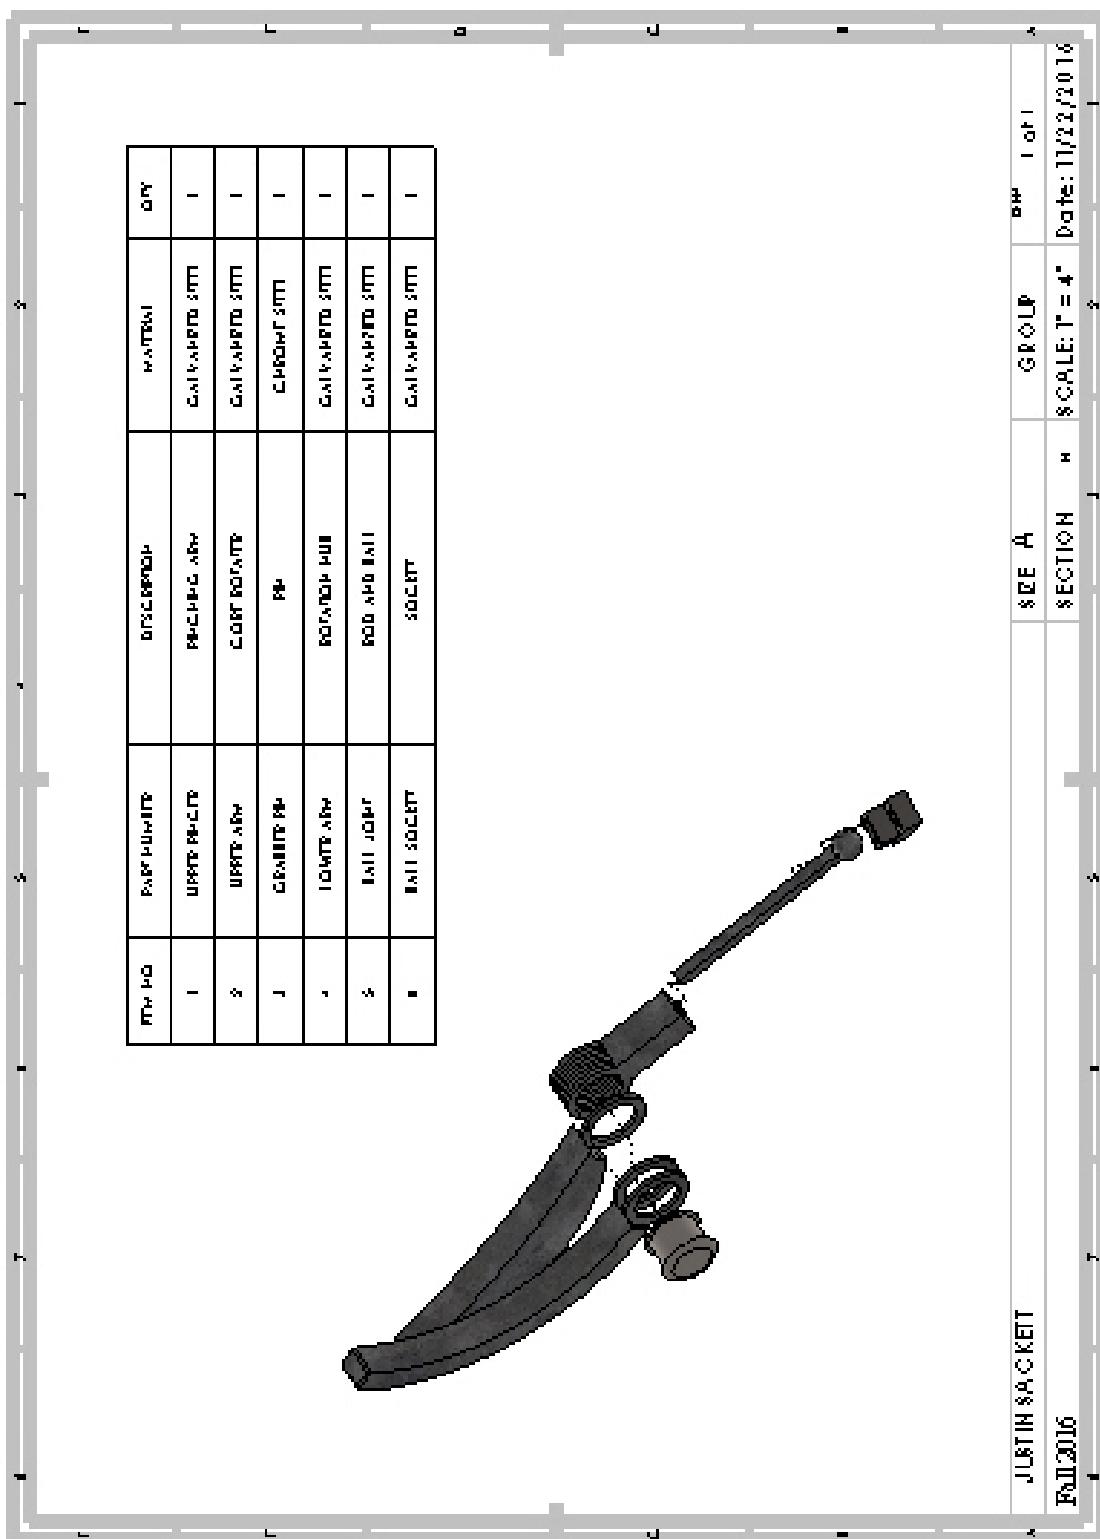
Sackett, Justin: Grabber Exploded
